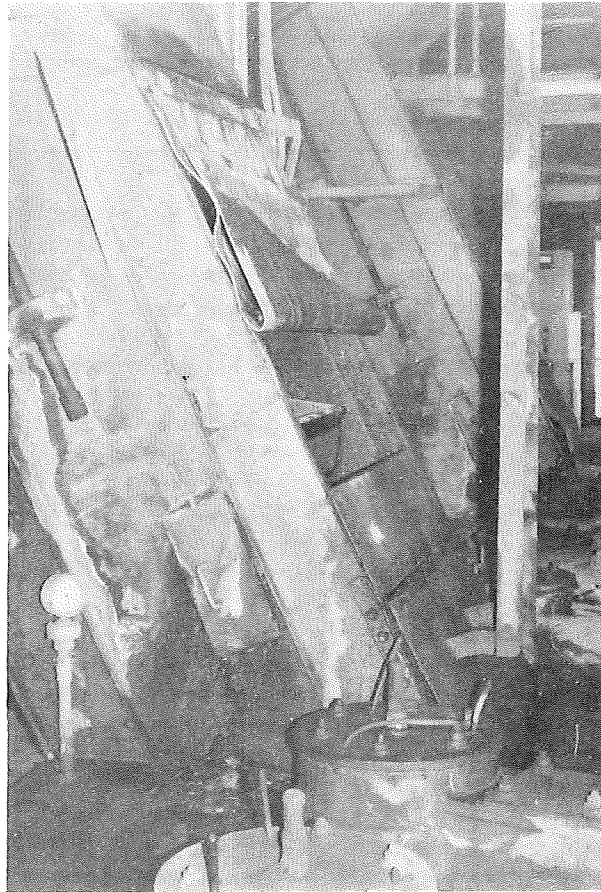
SHEET RUBBER COVER, SHOWN HELD OPEN, OVER ELEVATOR BASKET TRACK.
